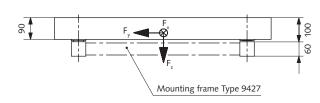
Dimensions of the large multicomponent force plate Type 9287CA
